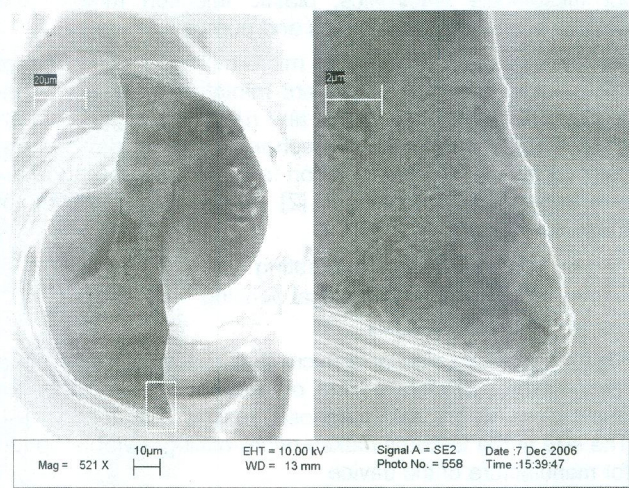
$126.9\mu\text{m}$ diameter WC-Co end-mill.
